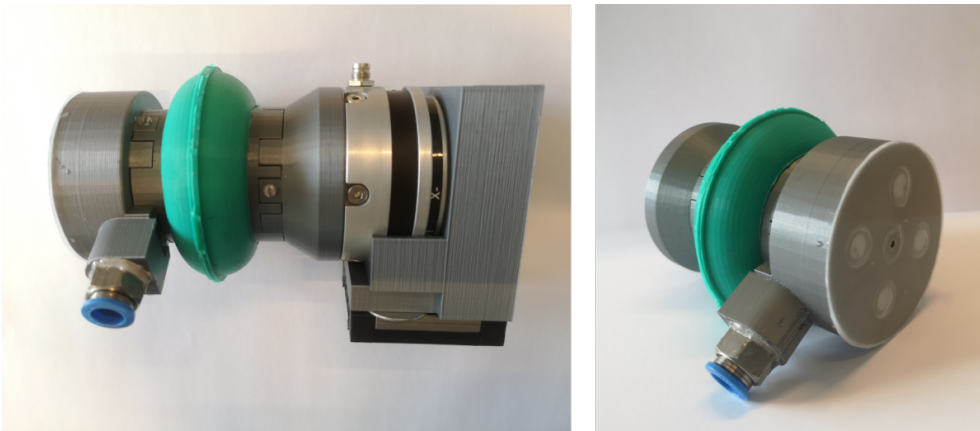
(left) The piston-slipper mechanism demonstrator, which is a combination of the shape shifting slipper, universal joint, 6-axis load cell and linear guide. (right) View of the pockets of the shape shifting slipper.
